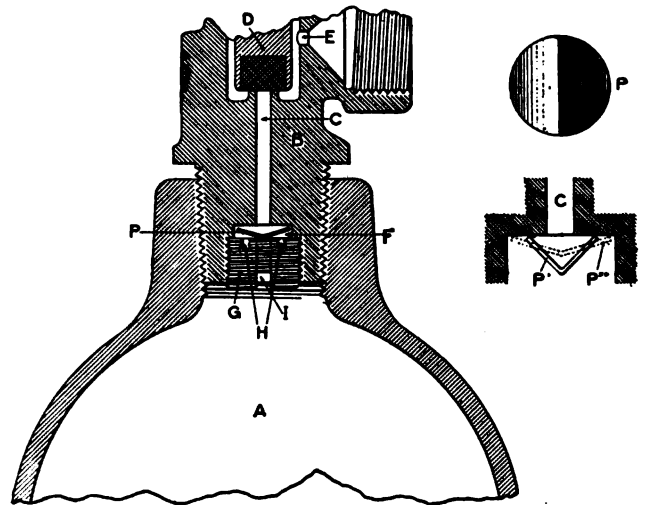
Cross of bottle head, showing details of pressure equaliser. Small drawing at right shows equaliser on enlarged scale.
